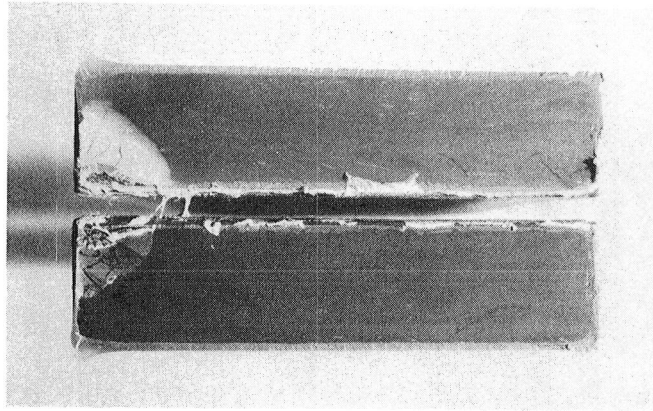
PHOTOGRAPH OF A TYPICAL FAILURE SURFACE OF A GRAPHITE/EPOXY BUTT JOINT (SPECIMEN GB-9).
